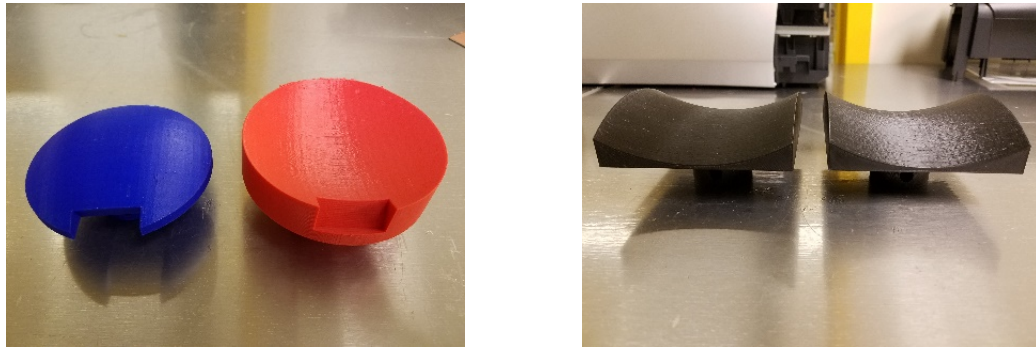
3D printed fixtures of 4 in. dome (left) and 4 in. saddle-like (right) surfaces
